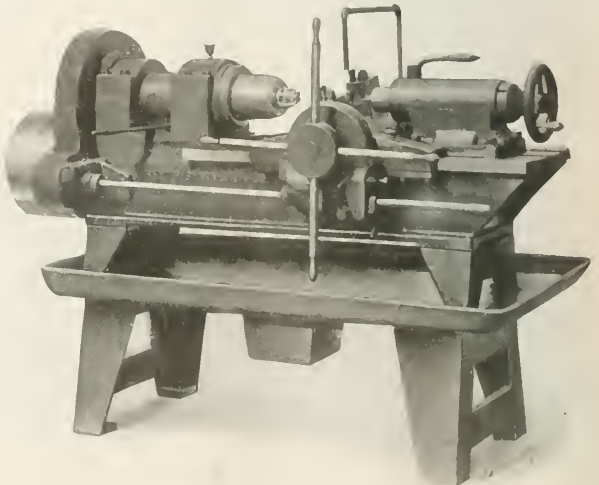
Type B Shell Lathe as equipped for rough-turning
